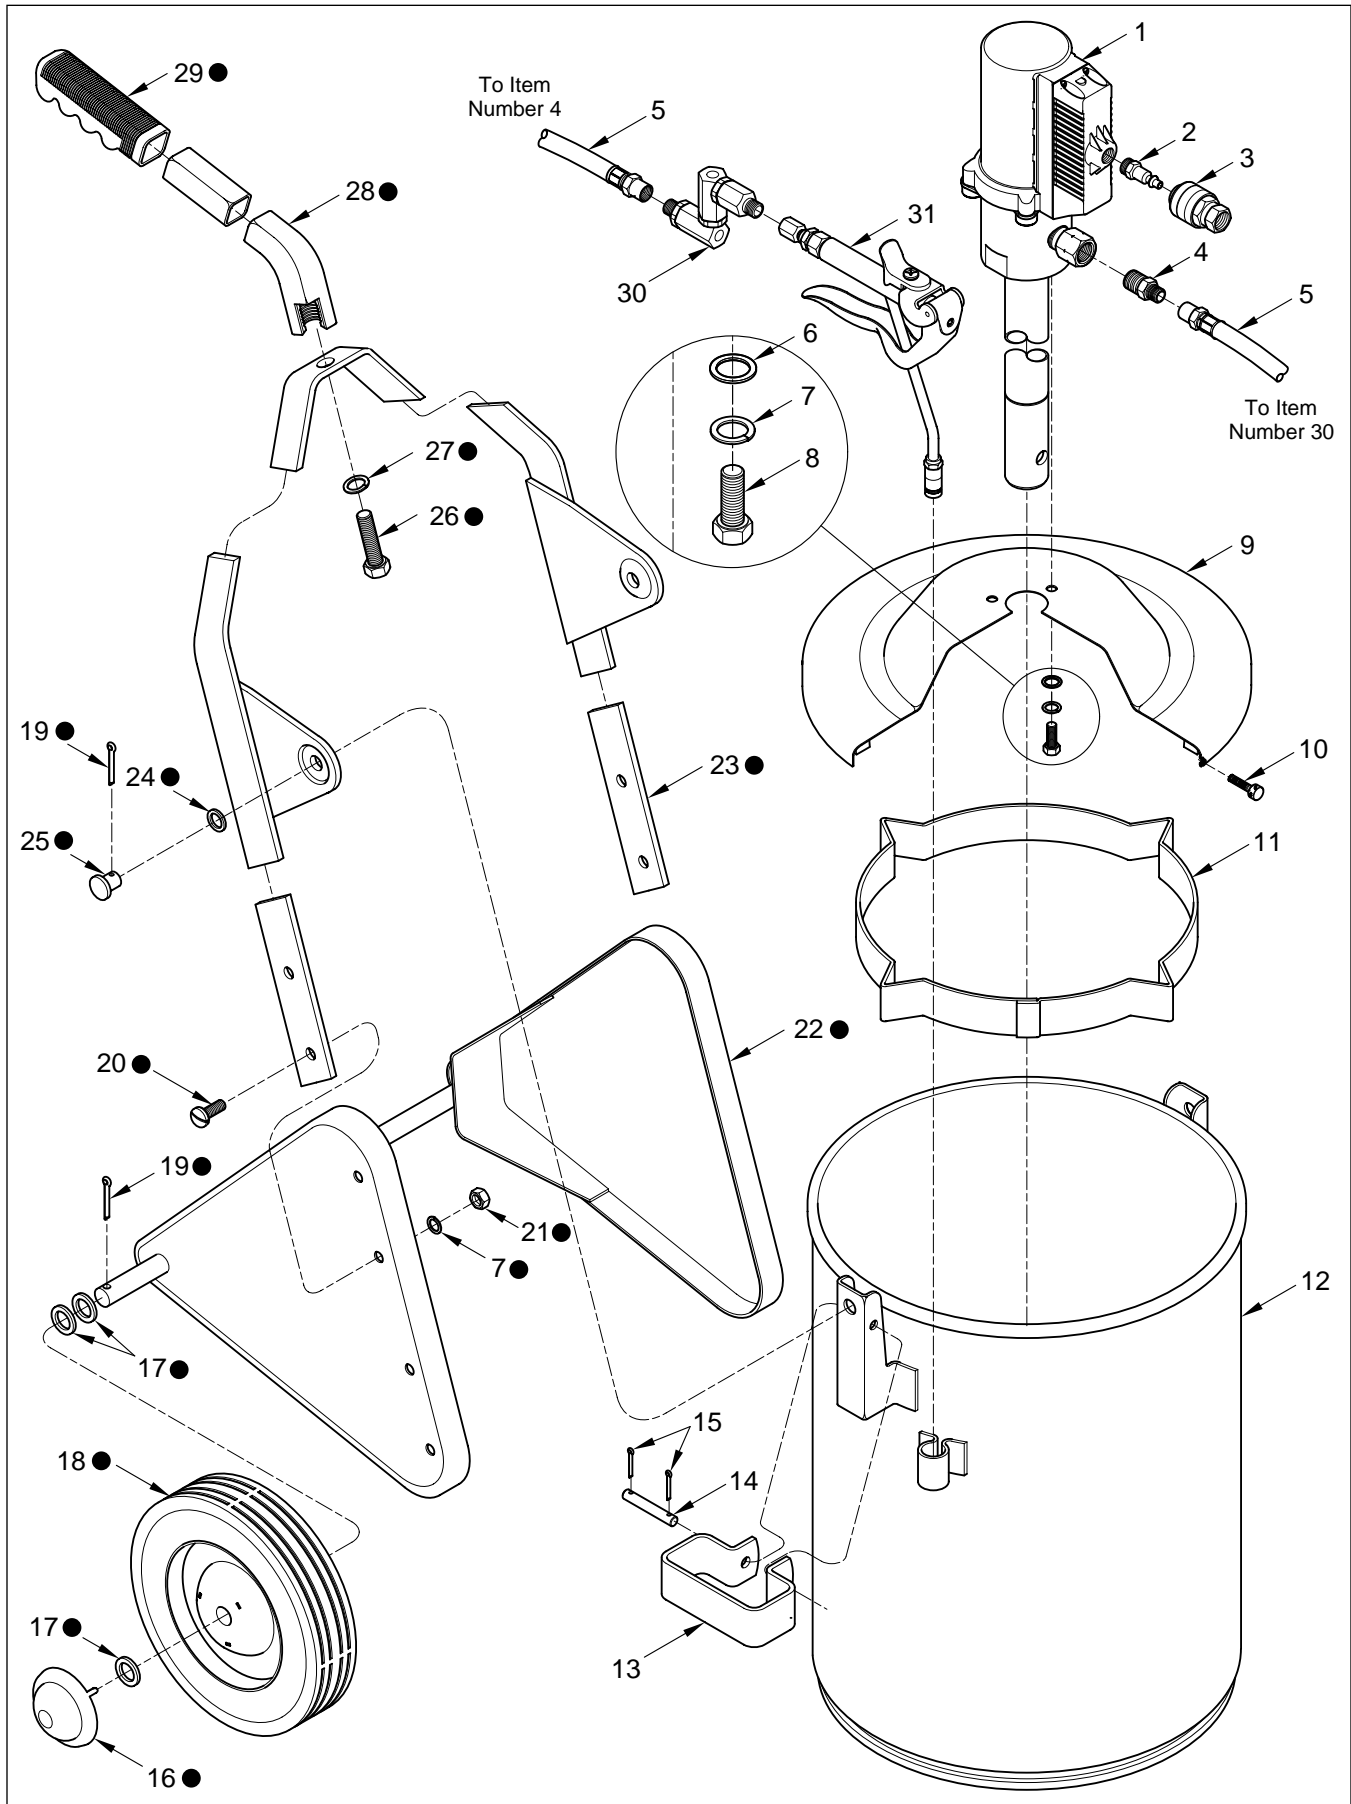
High-Pressure Portable Pump Models 9611-A and 9611-B - Exploded View
